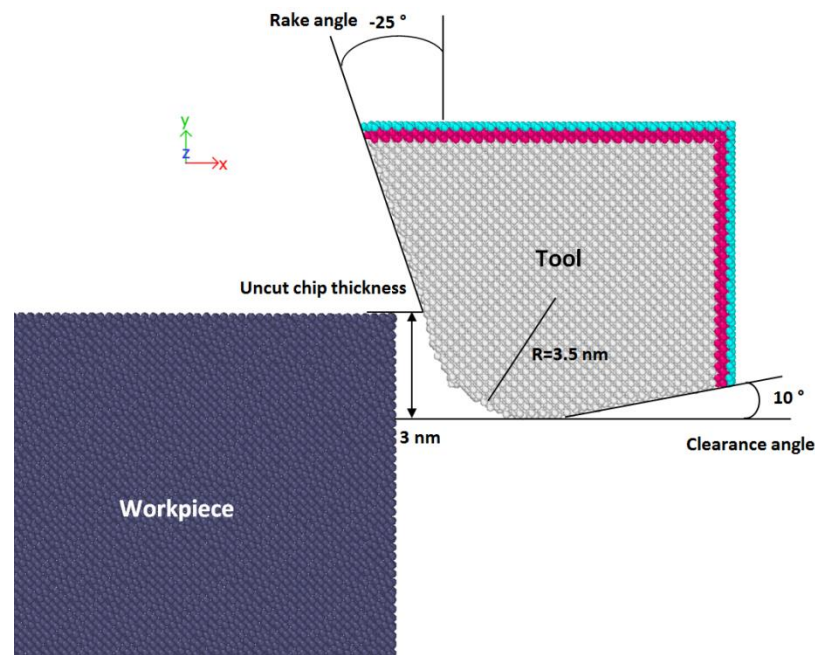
2D schematic of the MD simulation model illustrating the uncut chip thickness, tool tip radius, rake and clearance angles of the cutting tool
